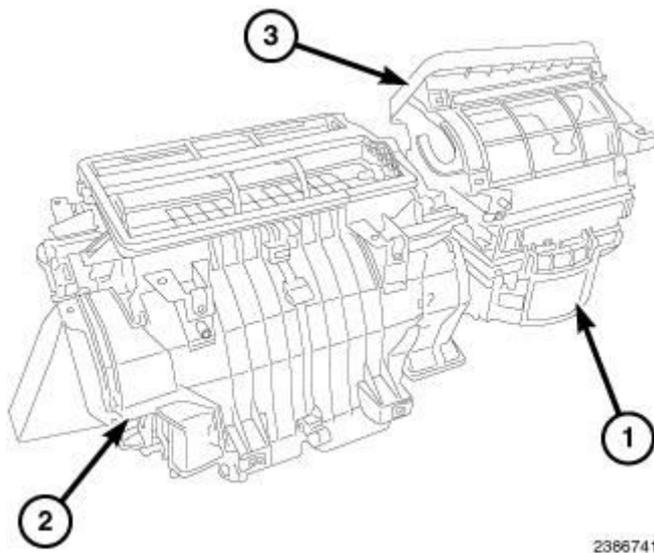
HVAC Housing, Air Inlet Housing & Air Distribution Housing
